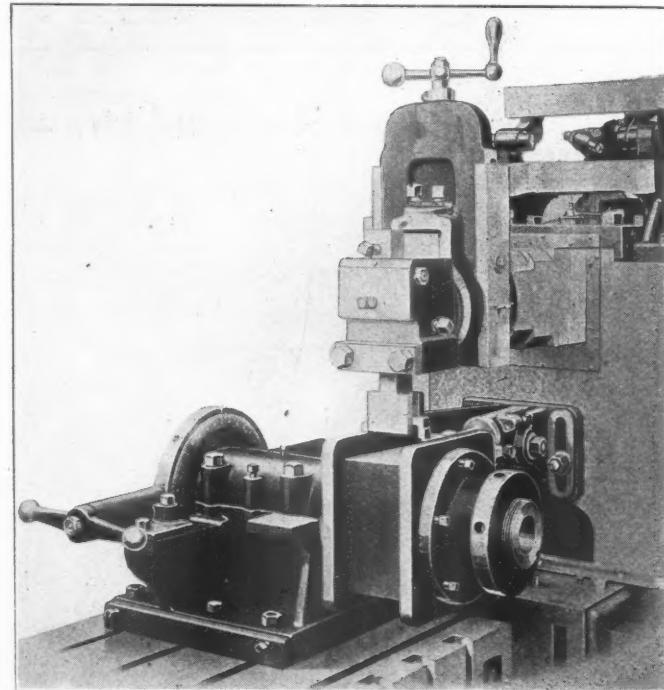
Attachment for Machining Strap Fit in Rod Brasses
